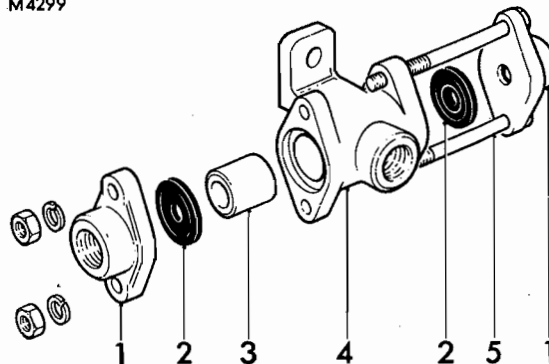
EXPLODED VIEW OF DOUBLE CHECK VALVE
